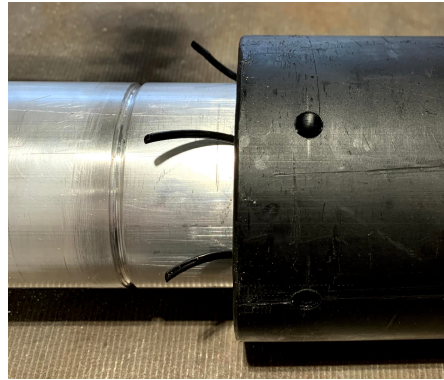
Example of O-ring failure do to extrusion during prototyping
